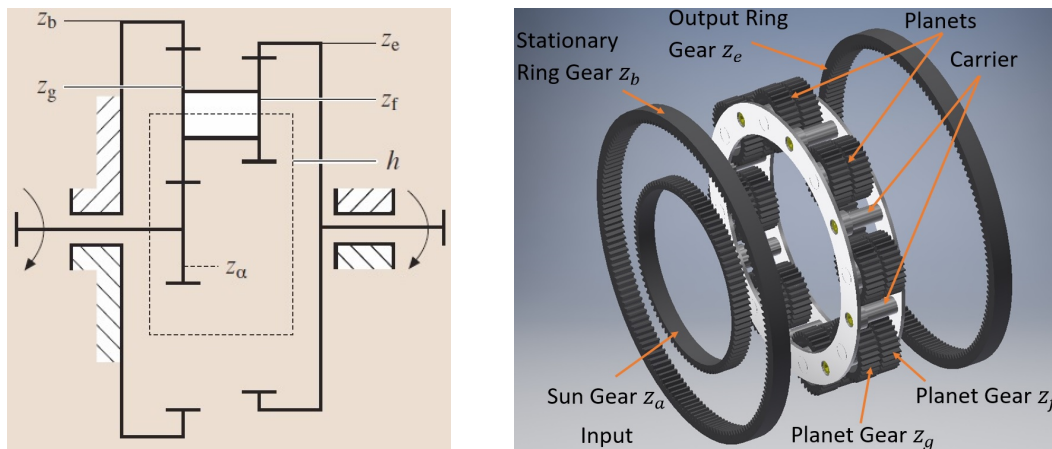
Wolfrom planetary gearbox layout [90] ©2009 Springer and CAD rendering.
